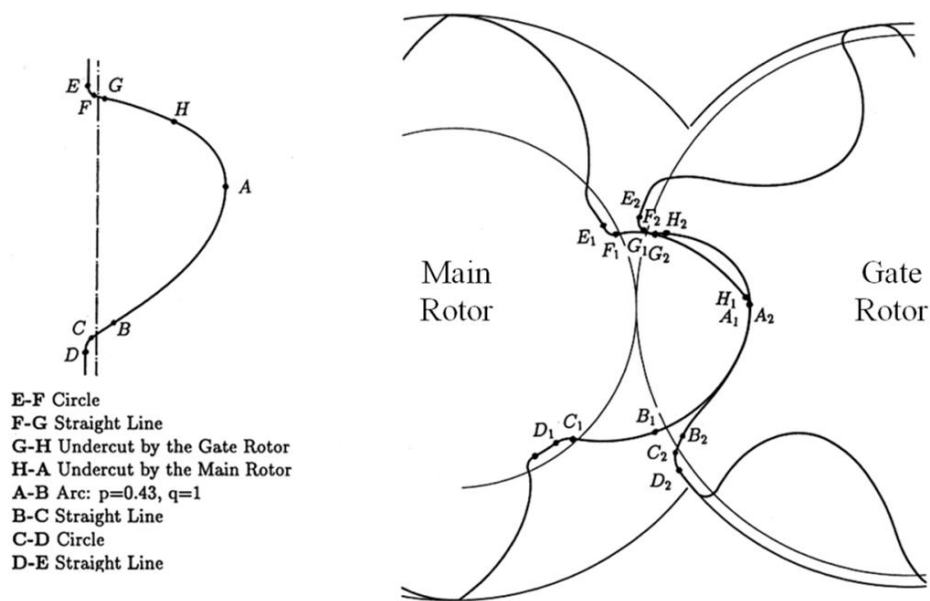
Description of the City University ‘N’ rotor profile for positive displacement screw machines
